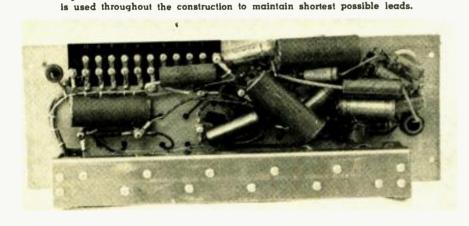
Rear view of the AM remote tuner chassis. Point-to-point wiring
